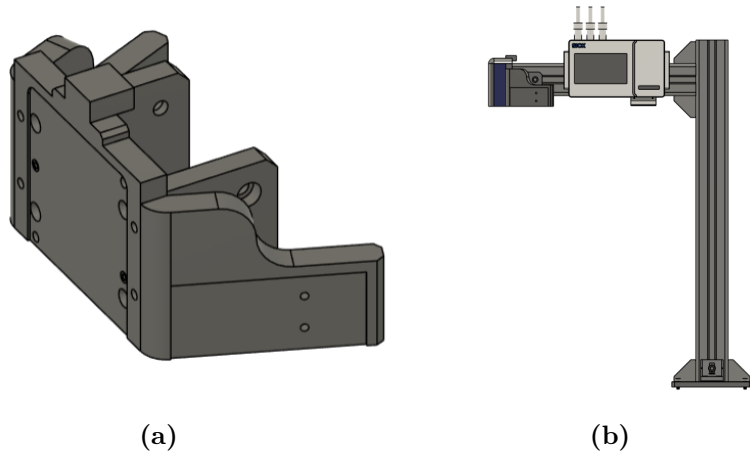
CAD drawings of the extruder fixture and the overall structure.
